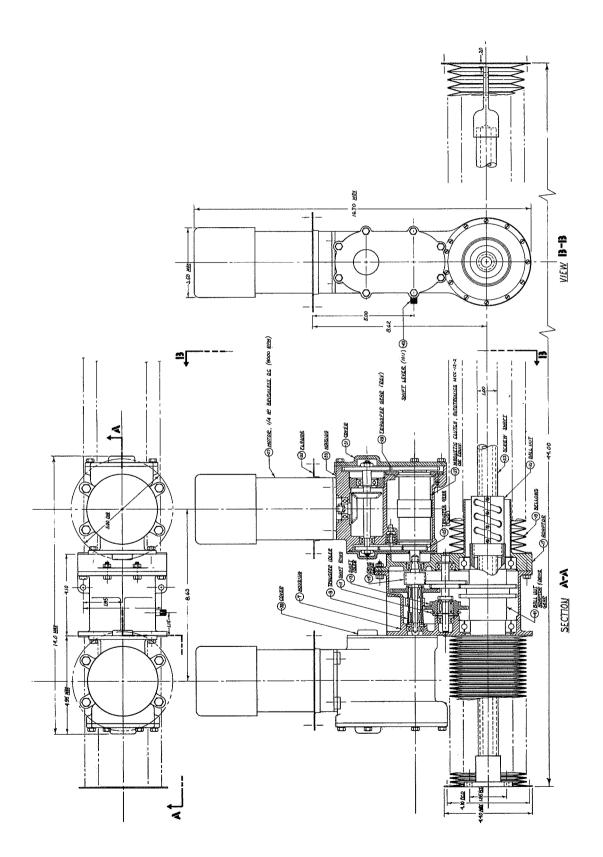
Counterbalance System - Counterweight Axial Drive Mechanism
